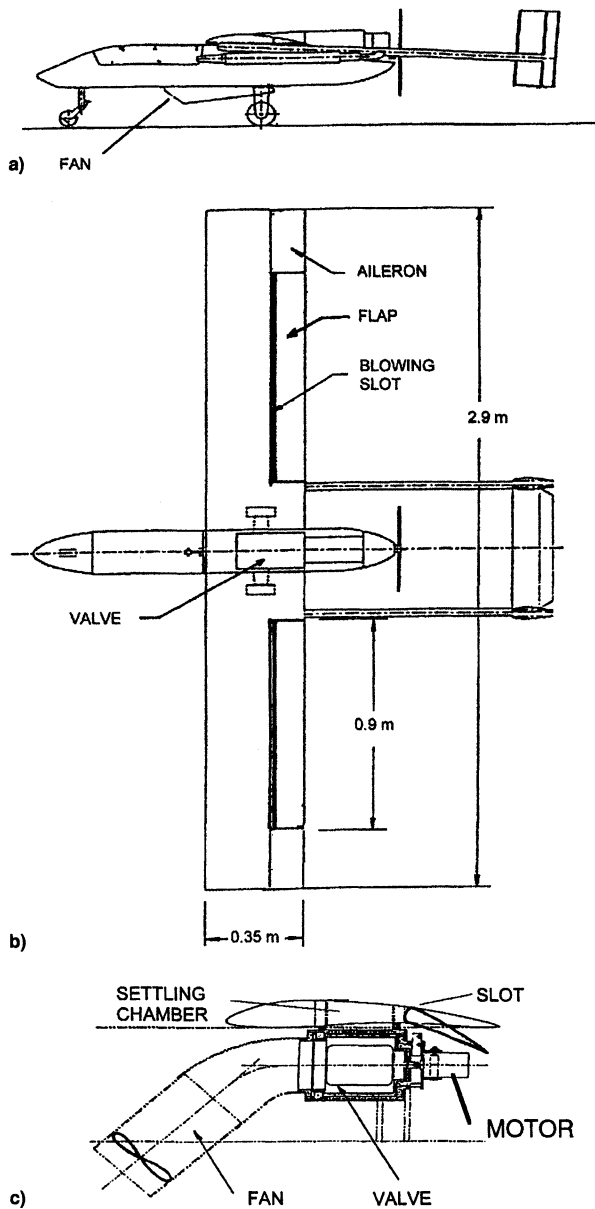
a) Side and b) top views of the modified, 1:2 scale Scout UAV, and c) side view of the fan-valve-wing assembly.
